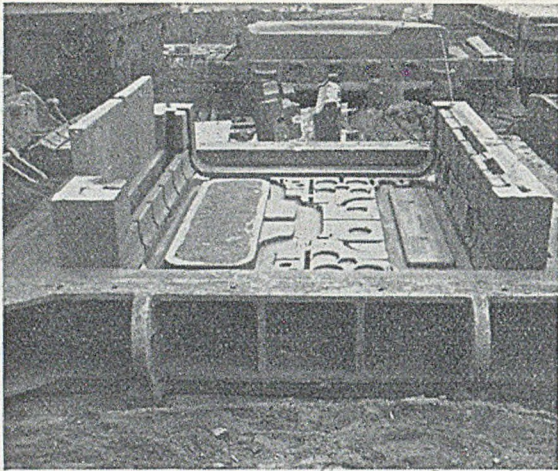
Side Cores assembled in the Condenser-shell Mould.
